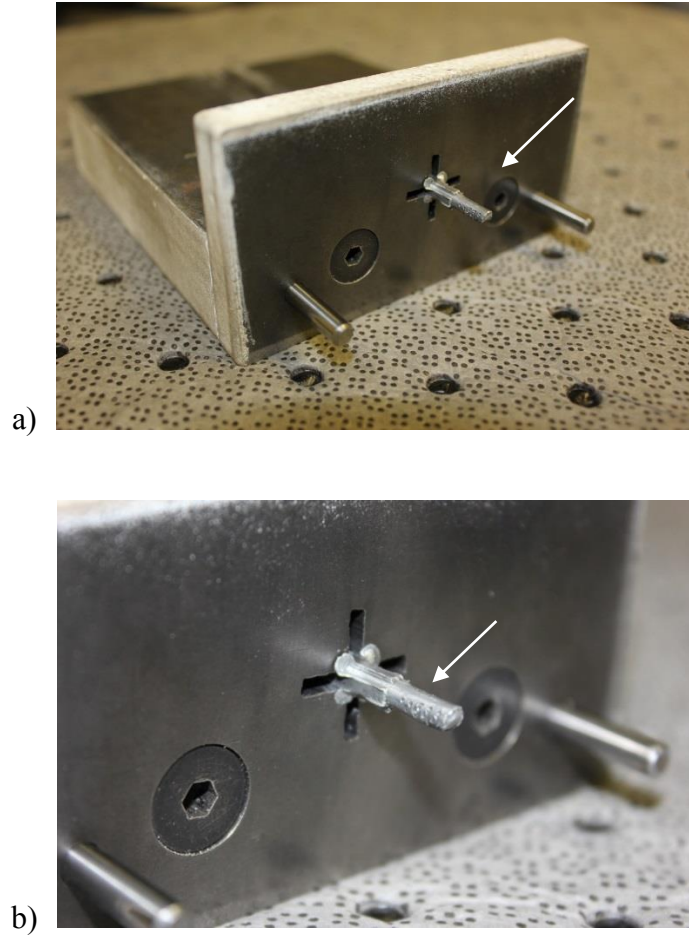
Close-up view of aluminum rod extending through die face plates
